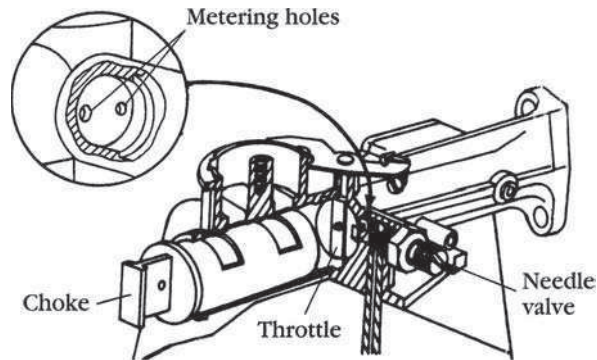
Vacu-jets and their Pulsa-Jet cousins draw through a pickup tube that extends into the fuel tank. An internal check ball prevents fuel from running back out of the tube. Note the plug-type choke and single-adjustment needle that controls both low- and high-speed mixture strength.* Briggs & Stratton Corp.
